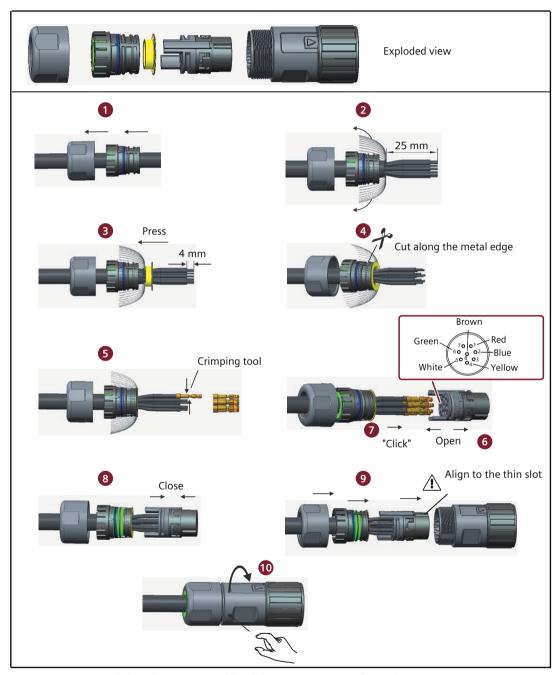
Assembling the encoder cable of the 1FL2 motor shaft height 45, 65, or 90
